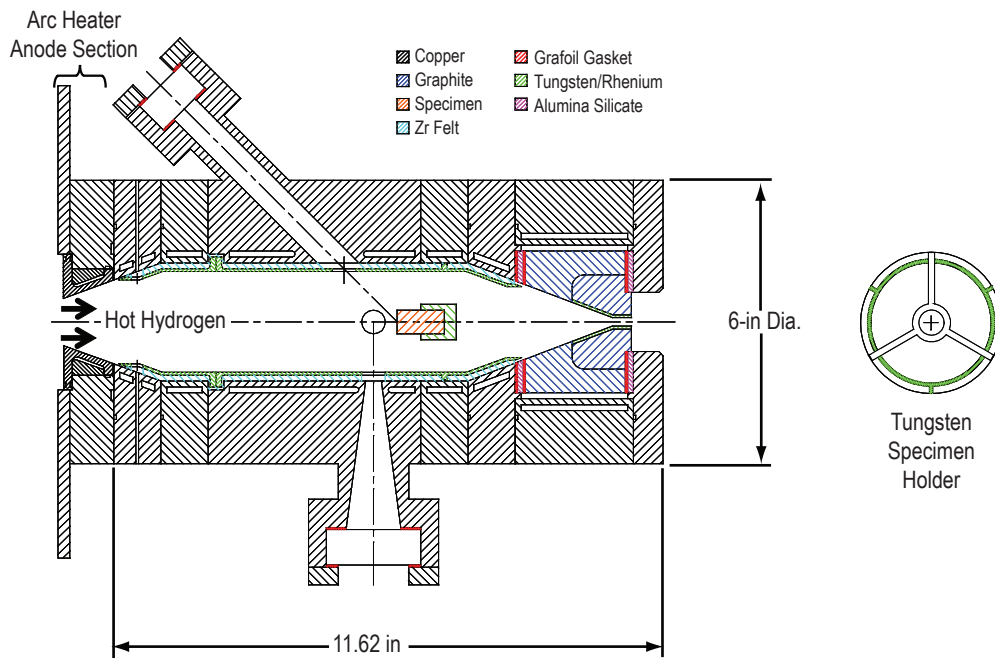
Test fixture layout for passive exposure of hot-hydrogen materials.
